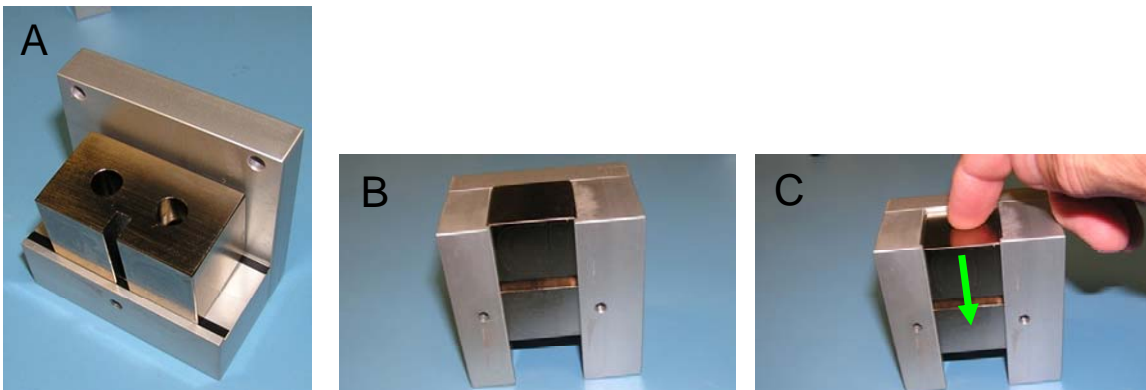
Photographs illustrating the proper orientation and alignment of the diverter block, which is essential to proper valve operation.
